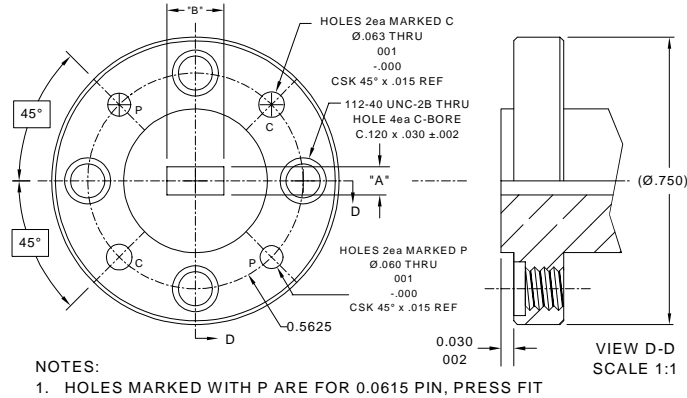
, Standard MIL-F-3922-67B- (67B) flange adapted to WR-08 and smaller.
